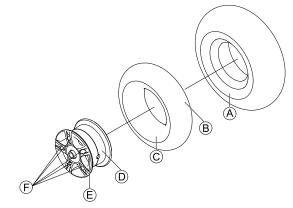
Example of Storm⁴ MAX castor wheel. Valve and valve cap ® are not shown in illustration.
